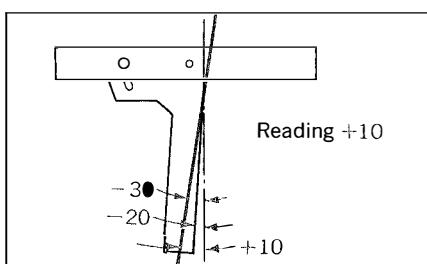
Final inspection of squareness employs a nitr alloy T-square, accurate to 10 millionths of an inch [0.00025 mm]. The square is self-checked by reversal. Tolerance of squareness of the machine axes is 20 millionths of an inch [0.0005 mm].
